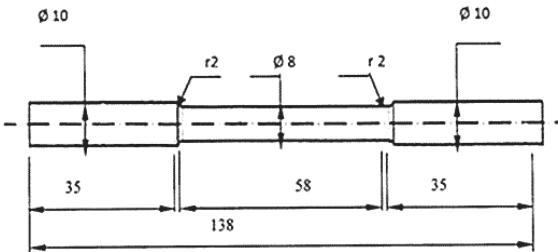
Friction welding specimen before cutting in the center (dimensions in mm)
